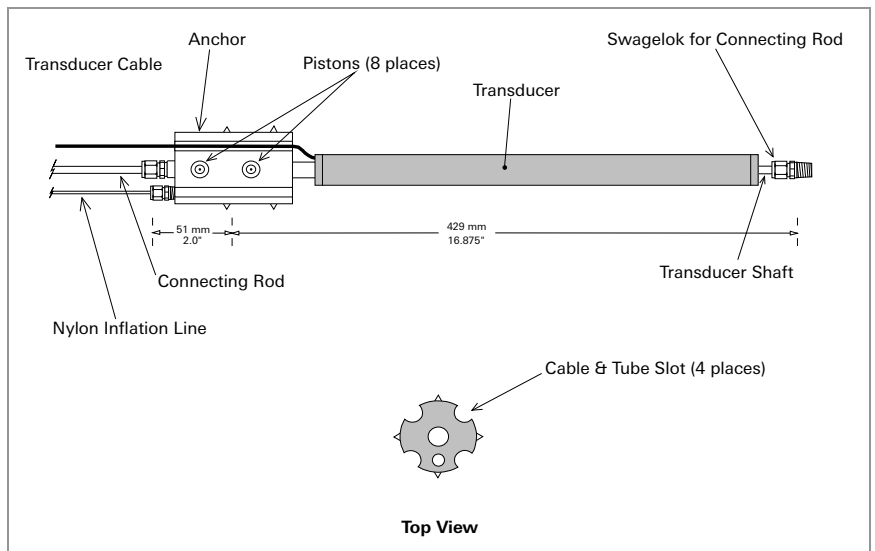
Model 1300 (A-9) Retrievable Extensometer Anchor
